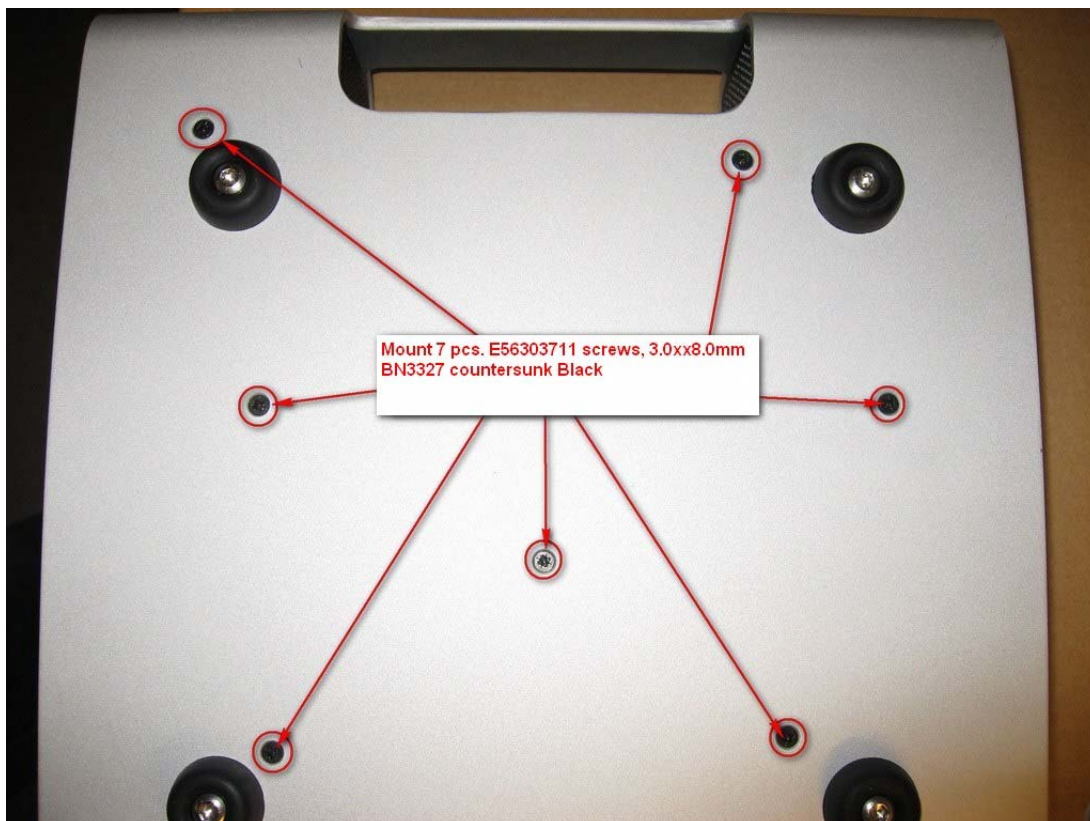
Mount the top cover to the inner box using seven screws as shown in the picture.
